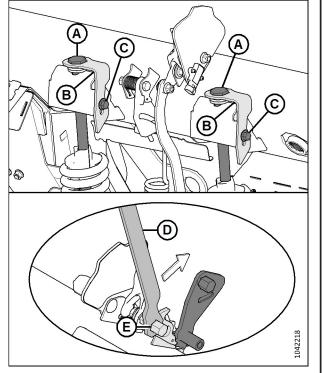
Float Adjustment Bolts and Multi-Tool on Pawl
